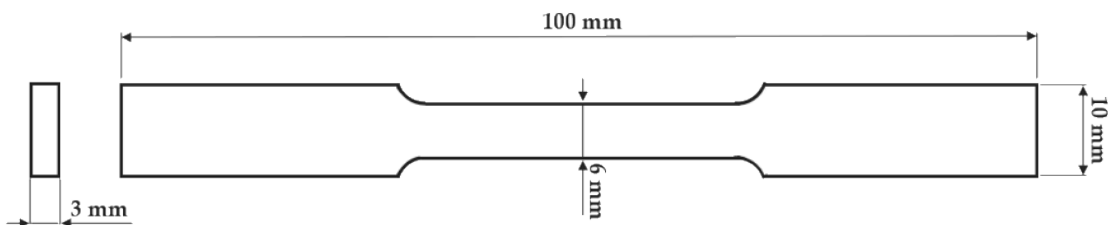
Tensile test specimen drawing with dimensions, designed in accordance to ASTM E8 (ASTM, 2024). Provided by INEGI.
